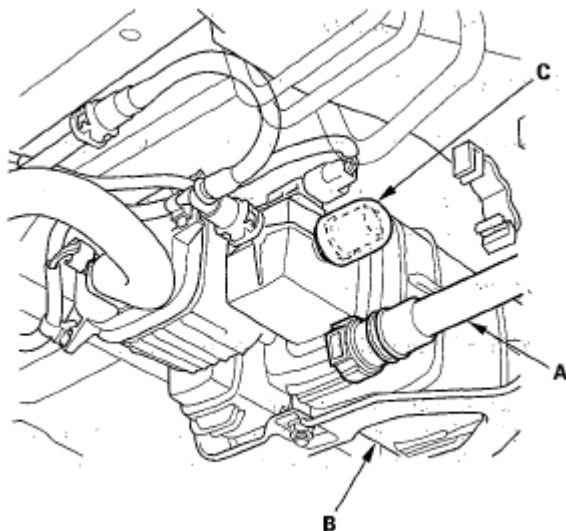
Identifying Fuel Tank Vapor Control Valve Hose From EVAP Canister
